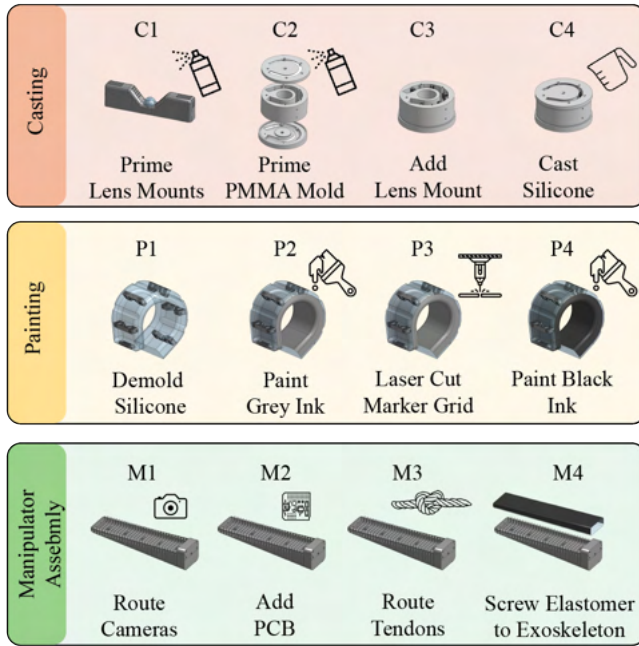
Manufacturing process flow of the continuum manipulator, which includes elastomer mold design, casting embedded rigid components, and painting the reflective skin.
